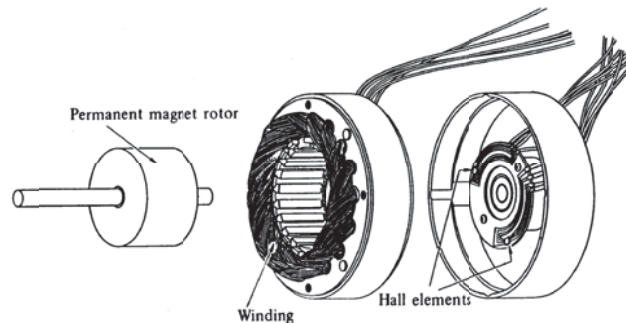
Disassembled view of a BLDC motor: PM rotor, winding and Hall elements
